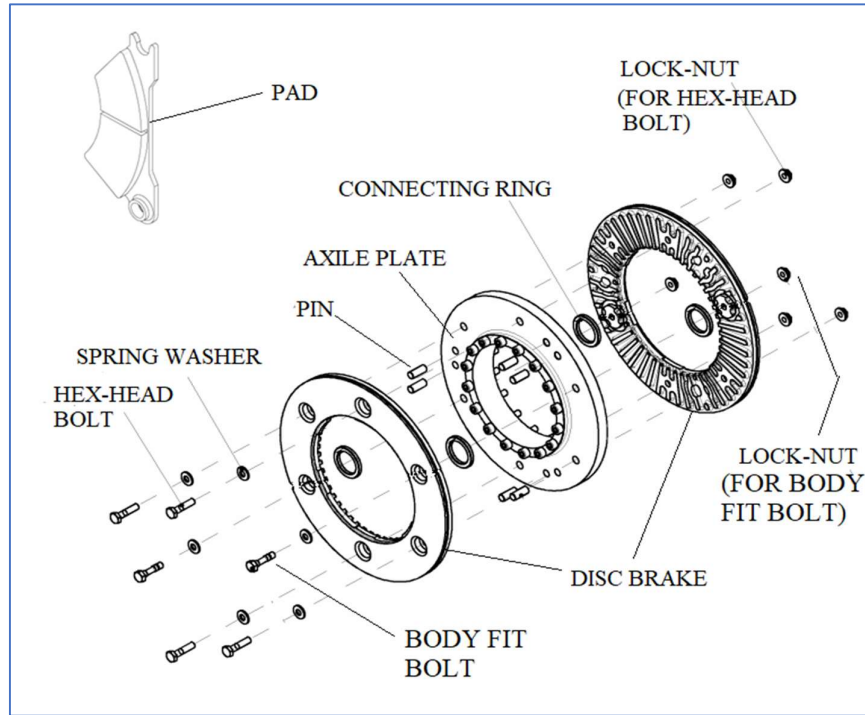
Exploded view of the friction surface-bolted disc brake assembly [32].
